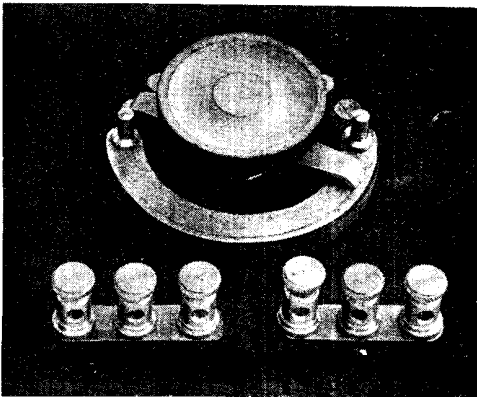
The completed coil is mounted so that the inductance comes over the central valve holder; it is held in place by means of screwed rod
